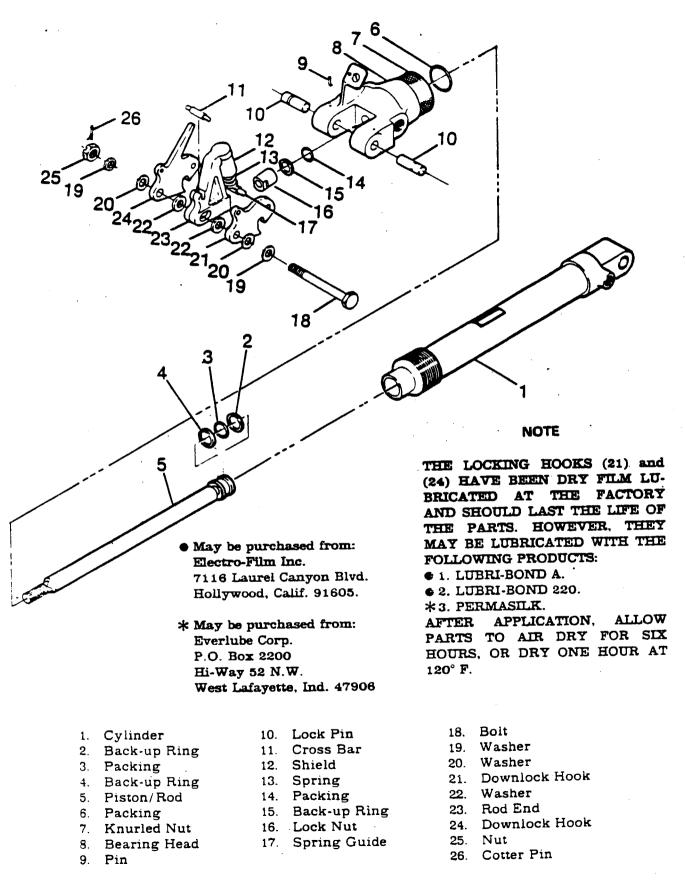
Nose Gear Actuator/Downlock Assembly
